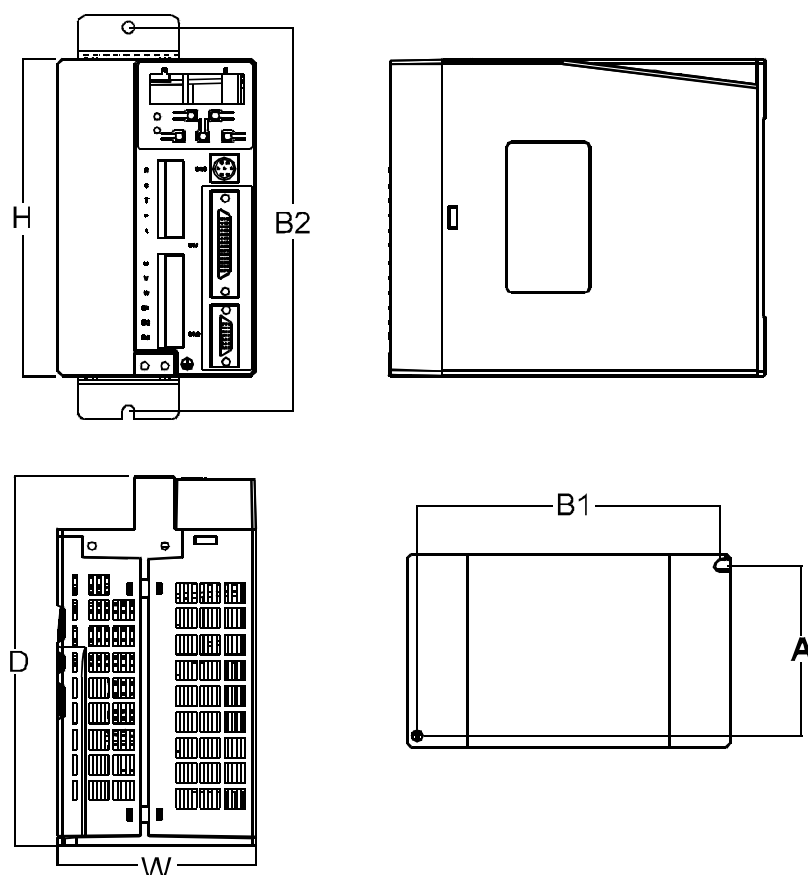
External dimensions of 0.2KW~5.5KW servo drive
